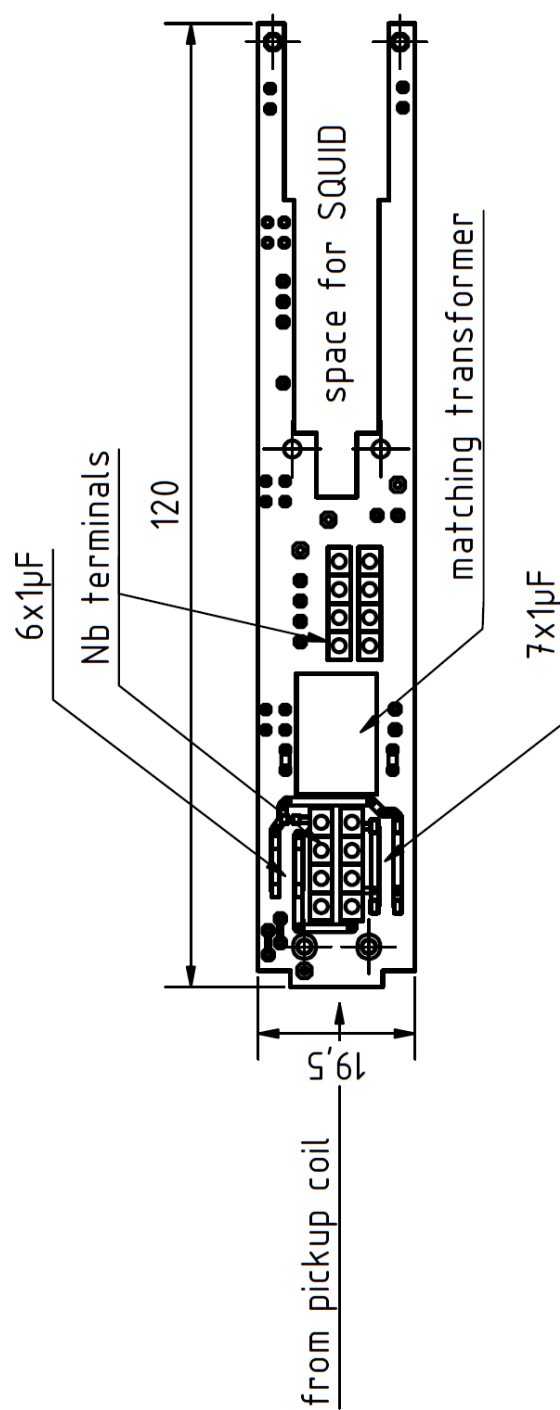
Mechanical drawing of the coupling circuit PCB.
